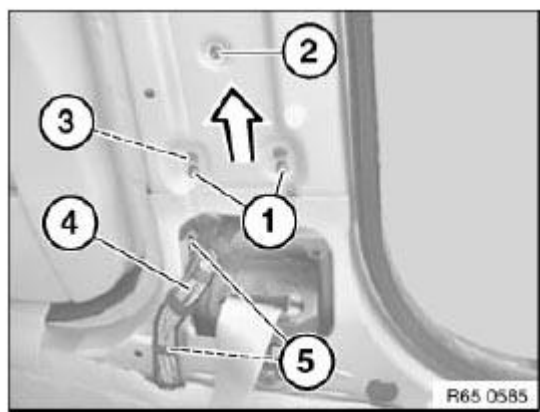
Identifying Screws, B-Pillar Sensor, Cable Duct And Points
